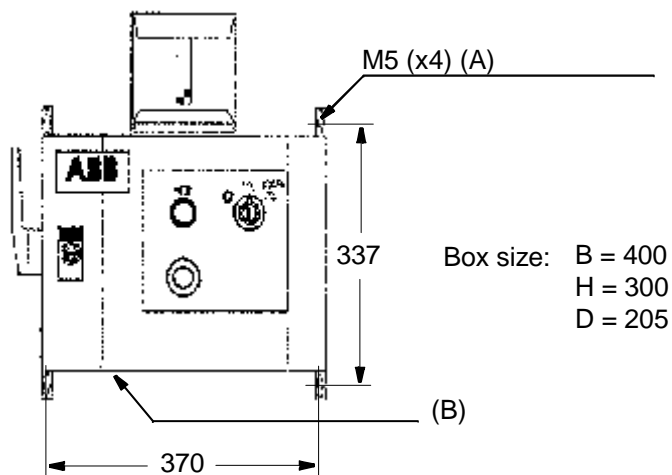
Operator's panel mounted in a box (all dimensions in mm).
